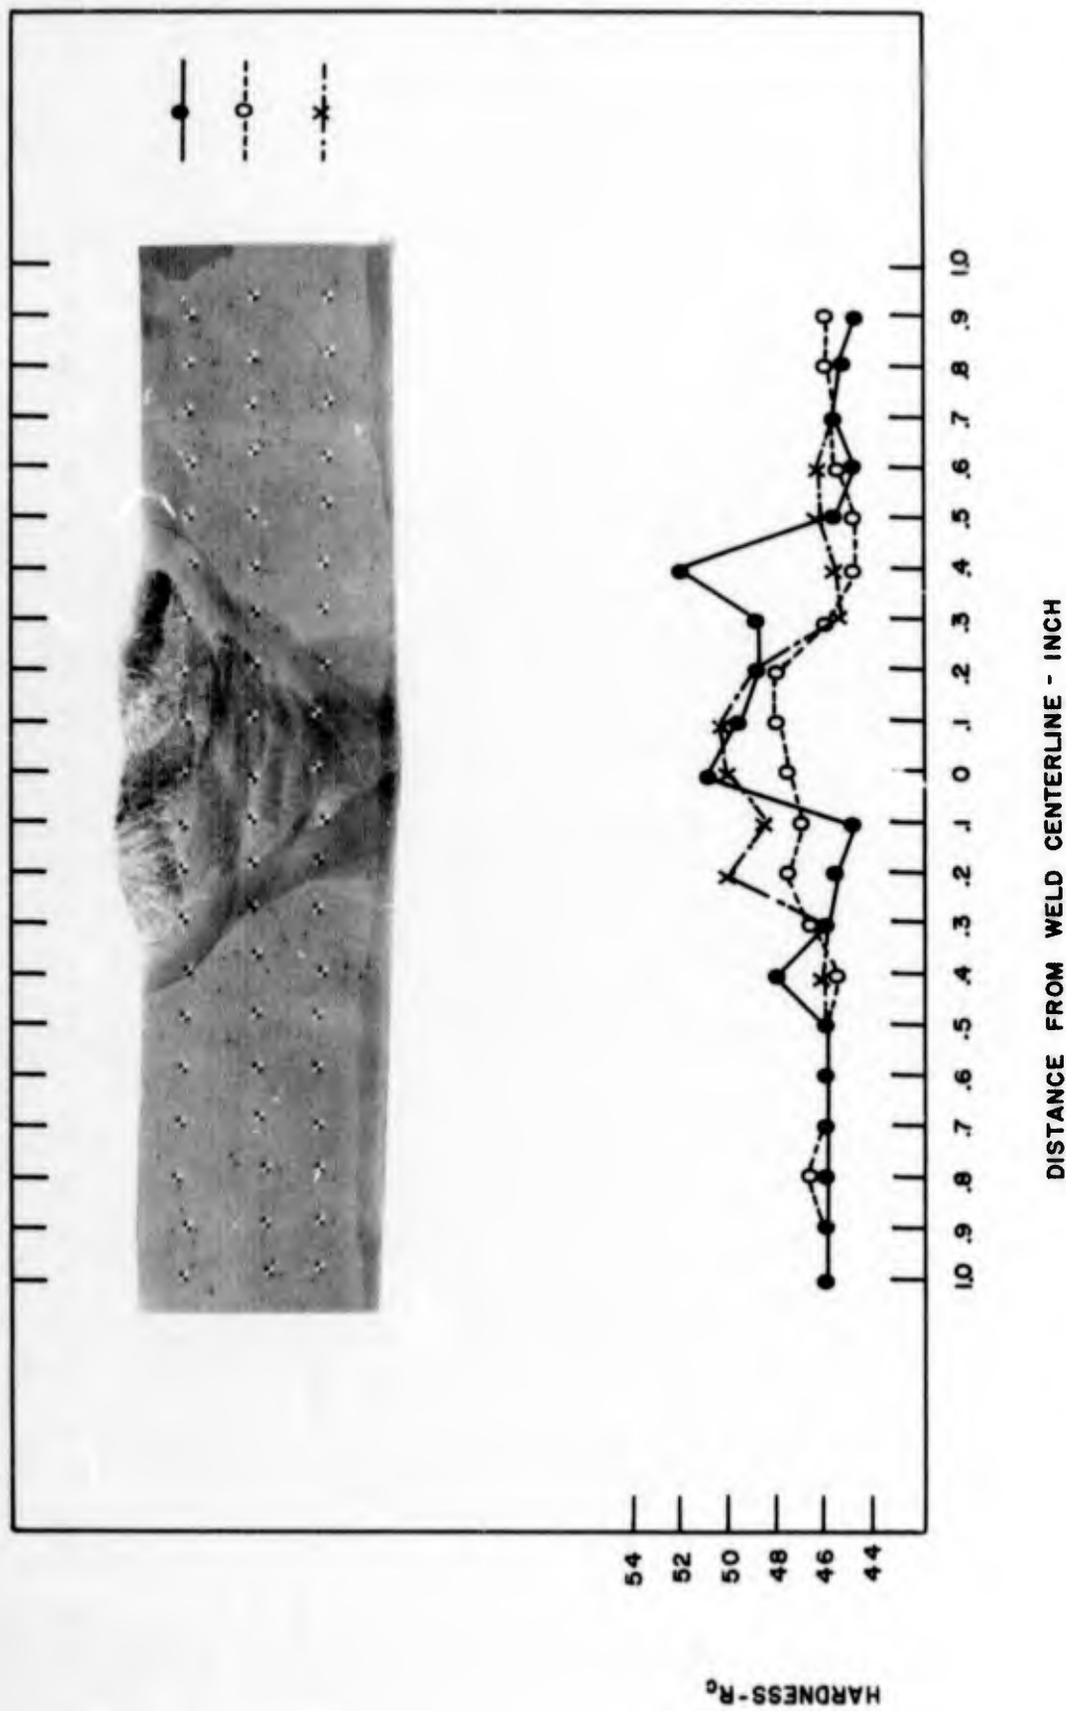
Hardness Survey of TIG Weld No. H247 Made in HP 9-4-20 Plate Using Filler Wire No. 11. (Unmodified HP 9-4-20)
